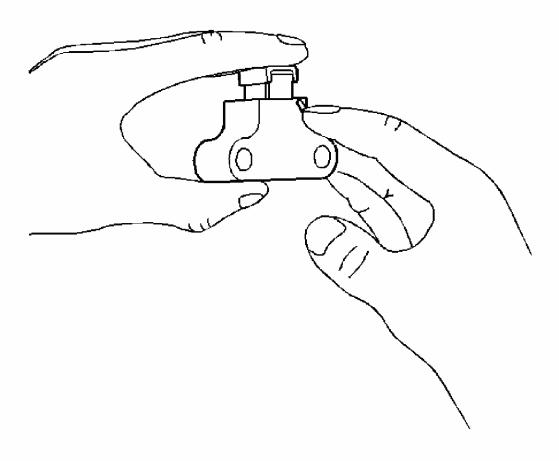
Collapsing Primary Camshaft Drive Chain Tensioner Courtesy of GENERAL MOTORS CORP.
